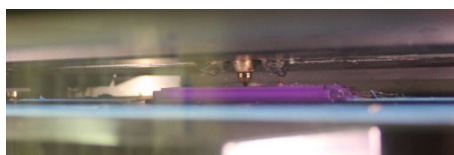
The extrusion process of part №13 with the use of 3D printer
